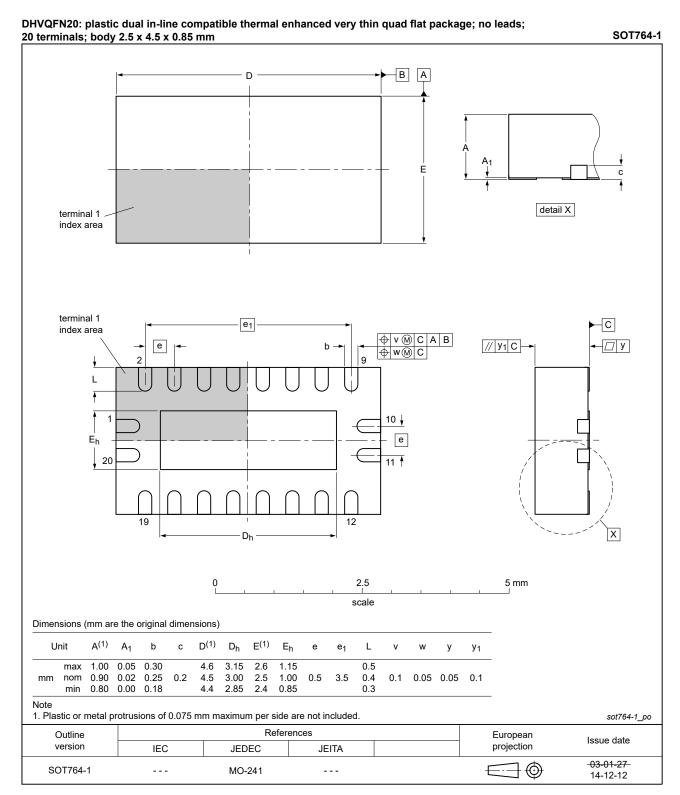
Package outline SOT764-1 (DHVQFN20)
